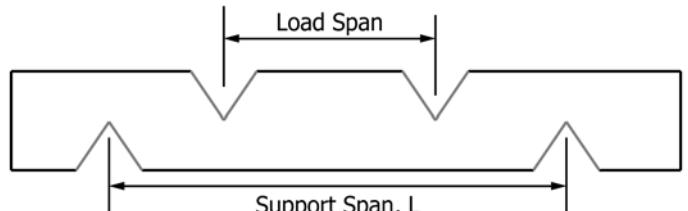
Fixture Used to Align Loading Noses and Supports
